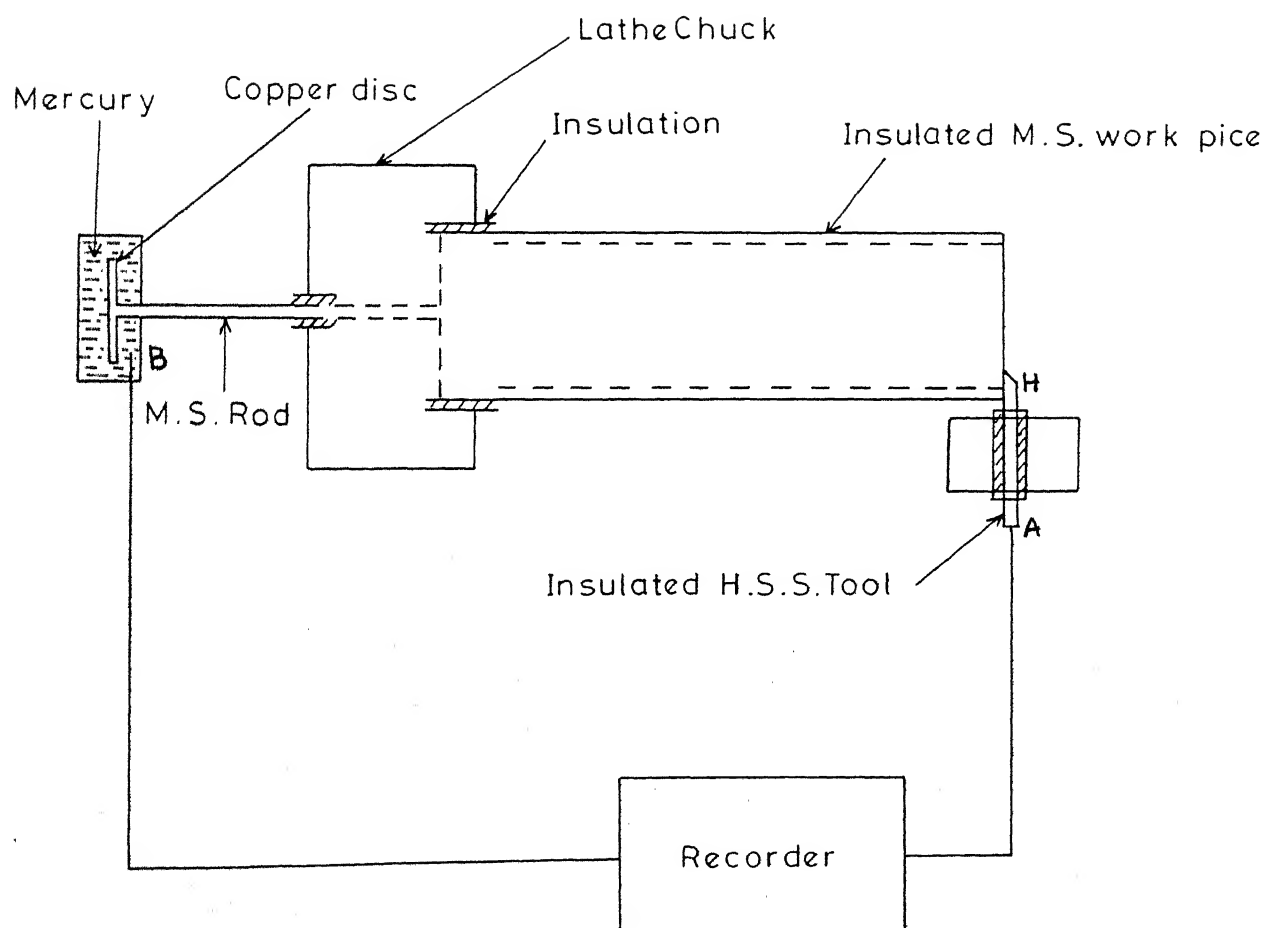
Schematic diagram for measuring chip - tool interface temperature.
